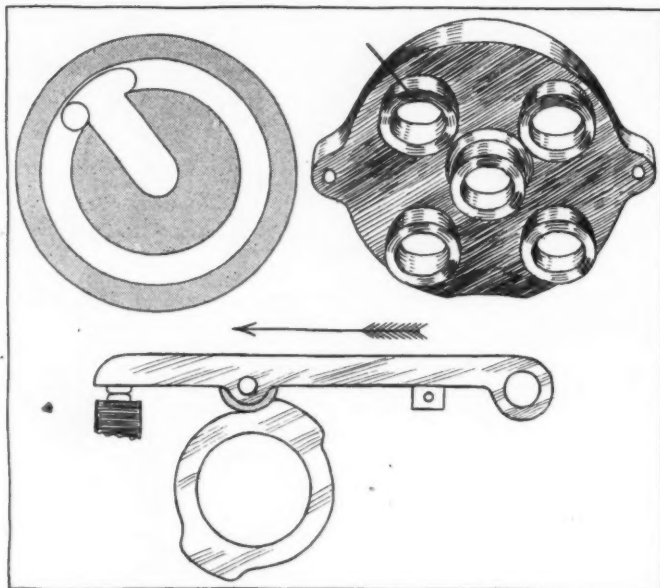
Position of distributor and opening in cover to which the wire from number one cylinder is connected; a view of the circuit breaker
